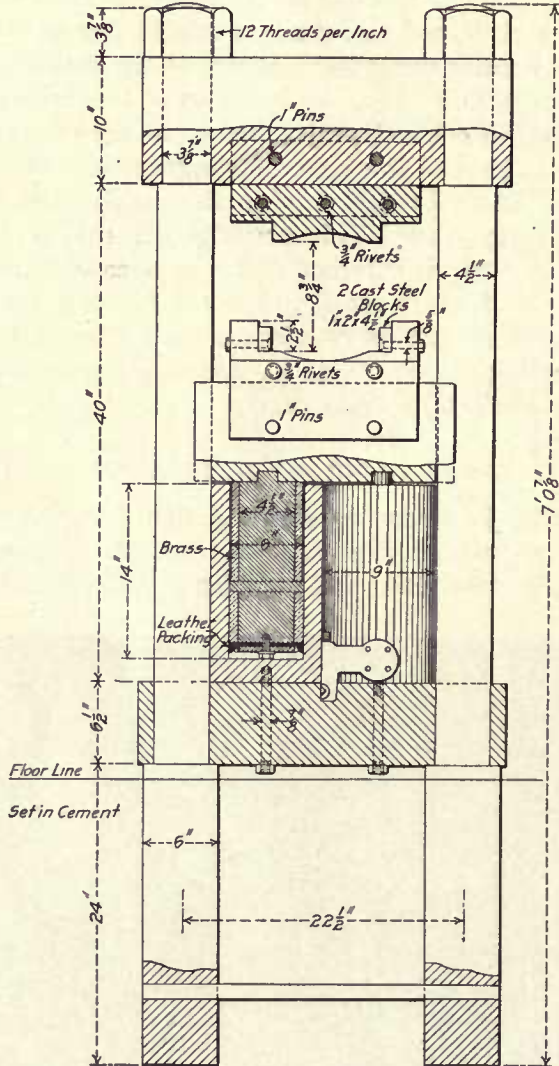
Hydraulic Press for Removing Yokes from Couplers.
